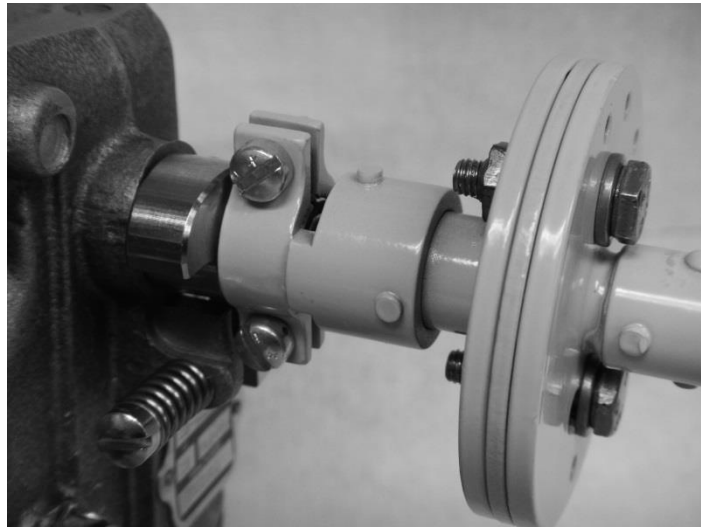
Proper Positioning of Carburetor Stop Arm and Throttle Linkage Adaptor
